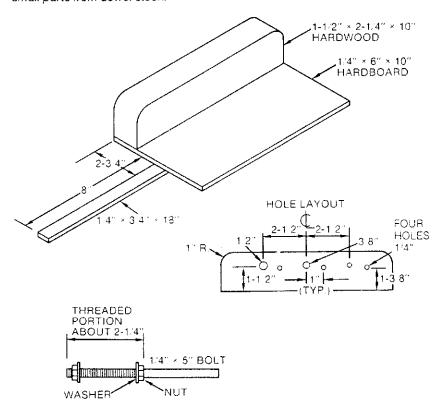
Construction details of the dowel turning fixture for 1/4", 3/8", and 1/2" dowels. Additional holes for other sizes of dowels can be drilled.
